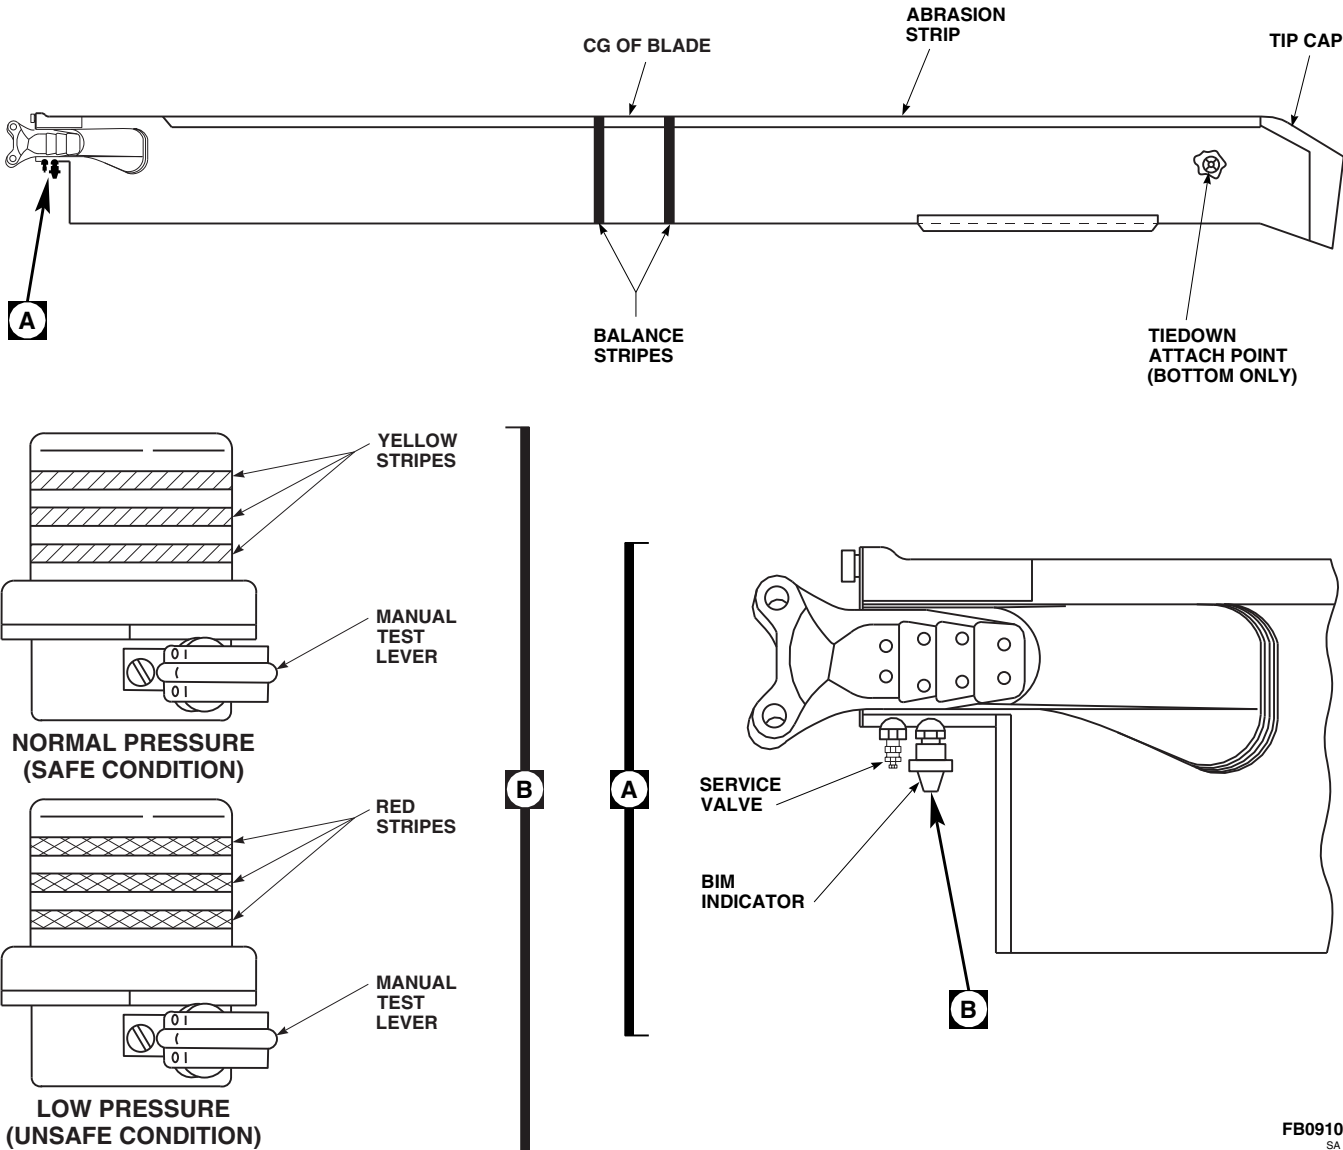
MAIN ROTOR BLADE AND PRESSURE INDICATOR
